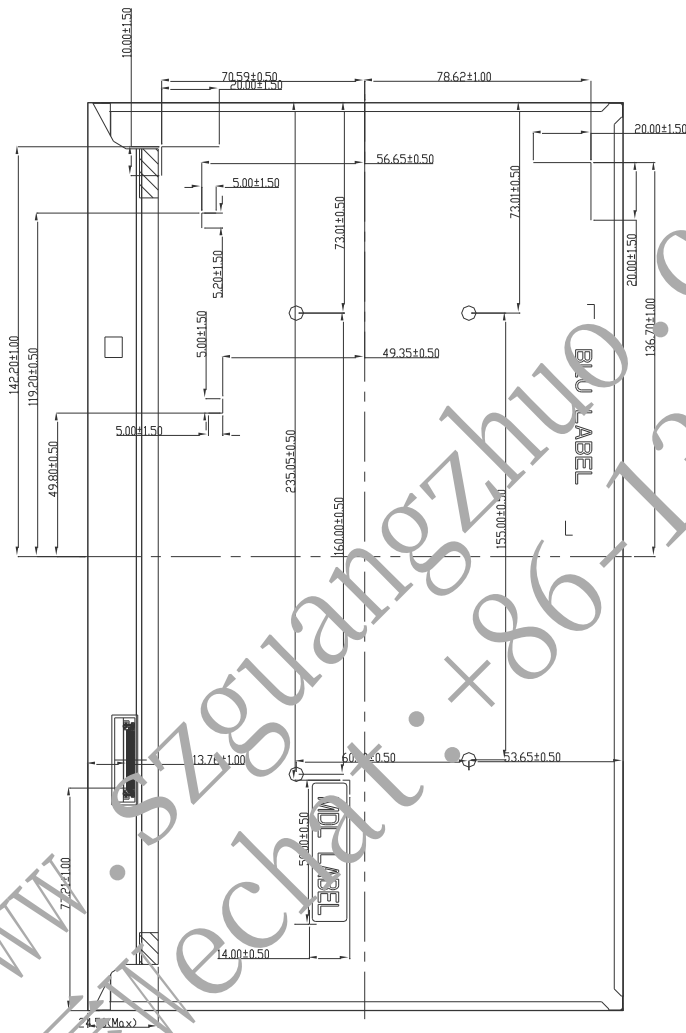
TFT-LCD Module Outline Dimensions (Rear view)
